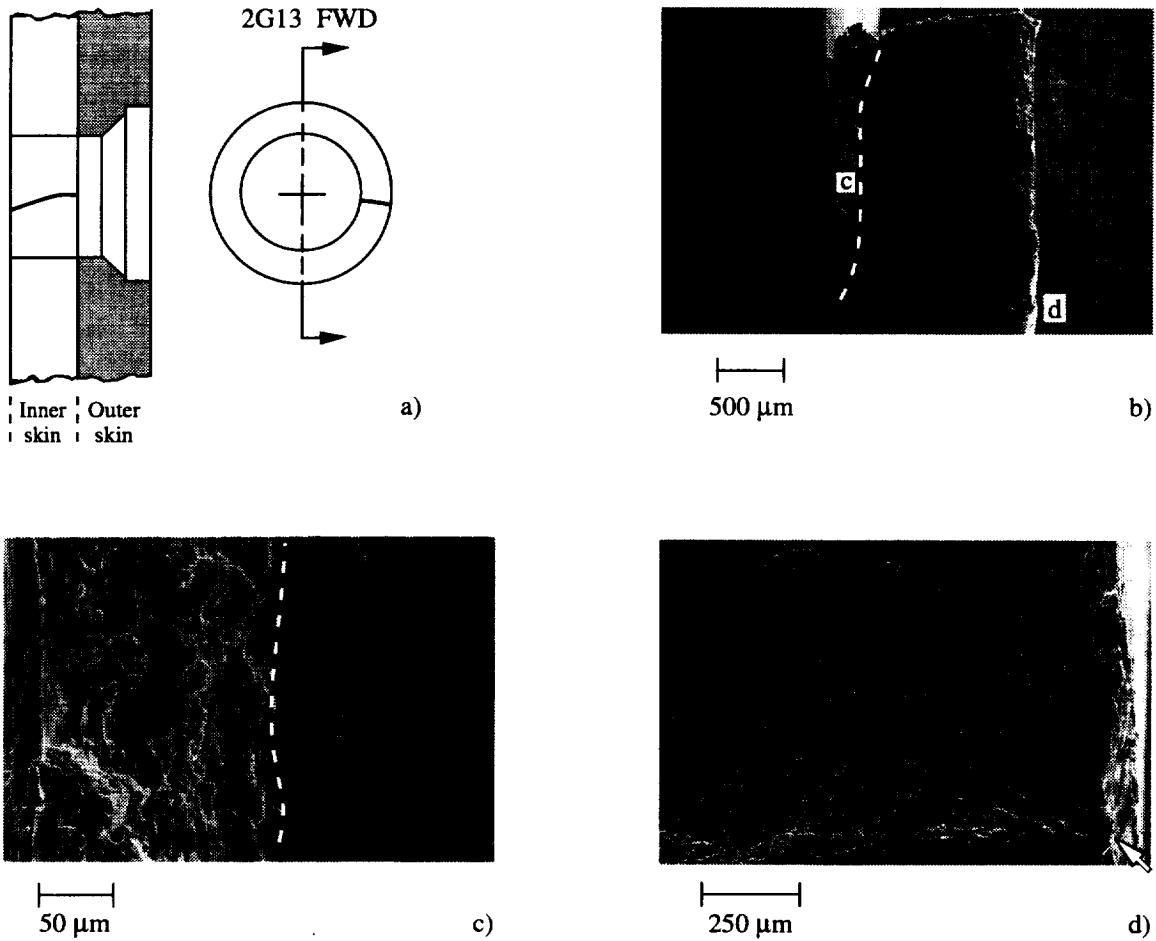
a) The schematic shows the rivet hole 2G13 configuration and the location of the inner skin fatigue crack oriented in the forward direction and about the 3 o'clock position. b) The SEM micrograph shows the fatigue crack fracture surface (the direction of crack propagation is from bottom to top of the figure) in the inner skin. The rivet hole is located at the bottom of the micrograph. The fatigue crack was cut during the removal of the specimen from the panel and a portion of the fatigue crack surface is not shown in the figure. The dashed line shows a portion of the fatigue crack front that extends nearly parallel to the inboard surface of the inner skin. c) The SEM micrograph shows the fatigue crack front region (dashed line) at region "c" in Figure 7.39.b. The fatigue fracture surface (right) exhibits a transgranular morphology while the overload fracture (left) exhibits a ductile appearance. d) The SEM micrograph region shows the outboard corner of the rivet hole (region "d" in Figure 7.39.b) at higher magnification. The arrow marks the likely site of crack initiation. The faying surface is located along the right side of the micrograph and the rivet hole is located at the bottom.
